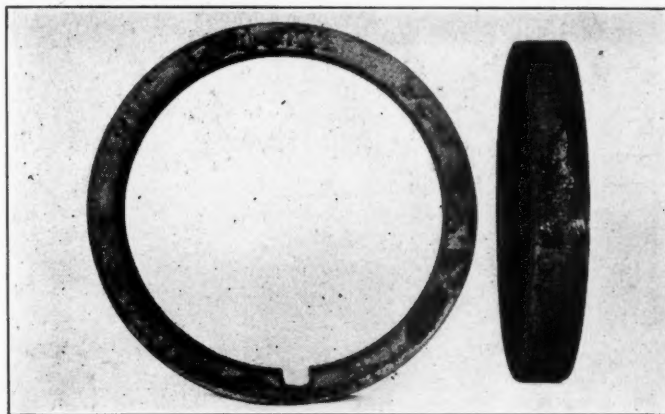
Rough Packing Tub from which Two Valve Packing Rings Are Made
